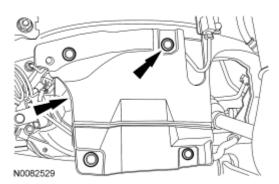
Locating Splash Shield Pin-Type Retainers Courtesy of FORD MOTOR CO.
